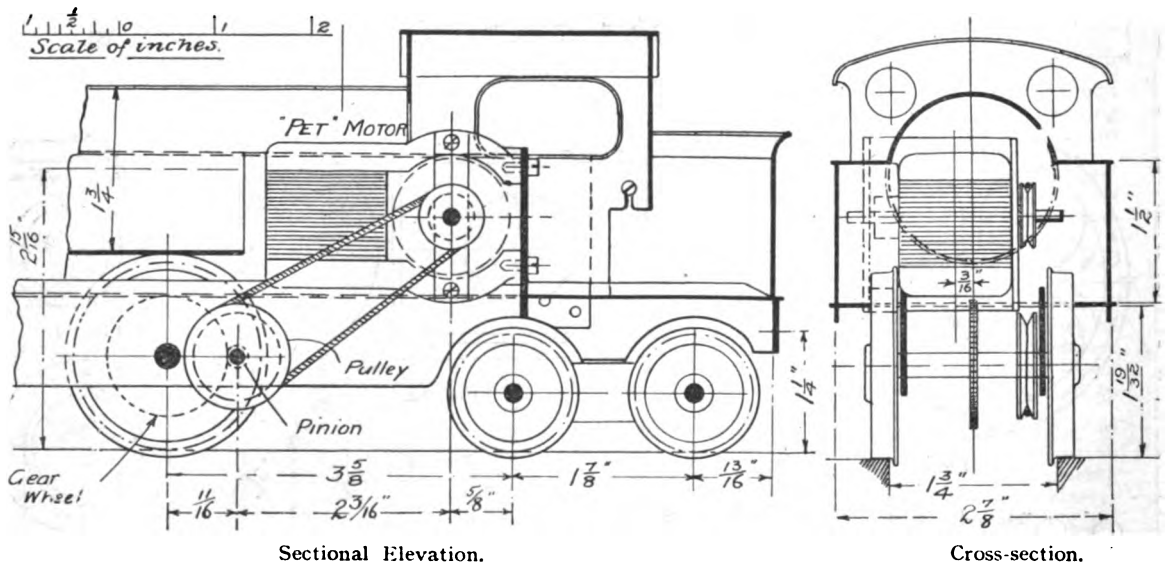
SHOWING A STANDARD "PET" MOTOR APPLIED TO A MODEL 1 1/4-IN. GAUGE S.E. & C.R. 0-4-4 TYPE TANK LOCOMOTIVE.
